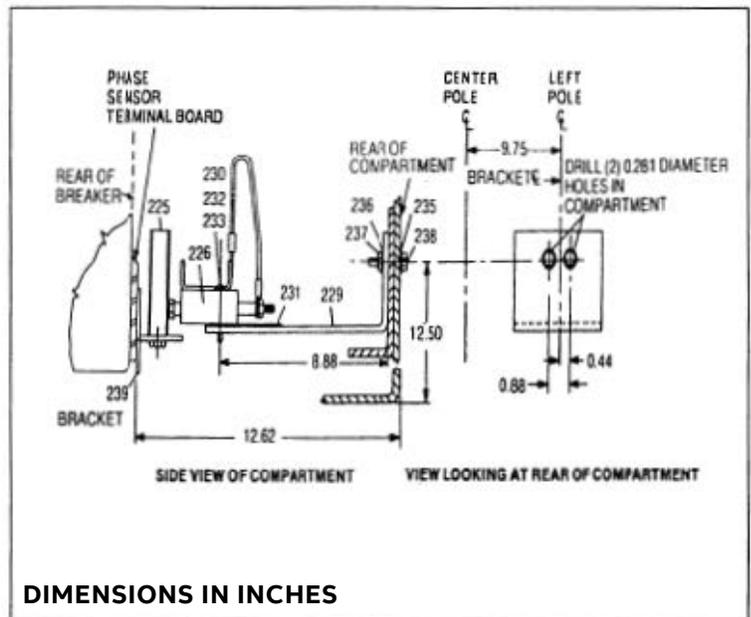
AK-100 4th Wire Disconnect Type AKO
